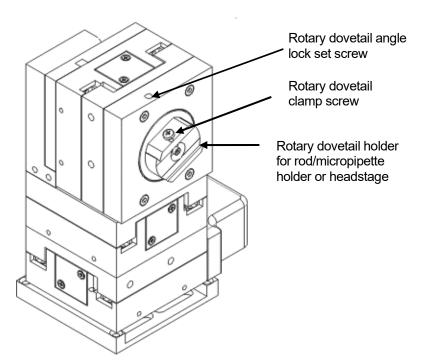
Angled side view of TRIO MP-245/M to change headstage mount
